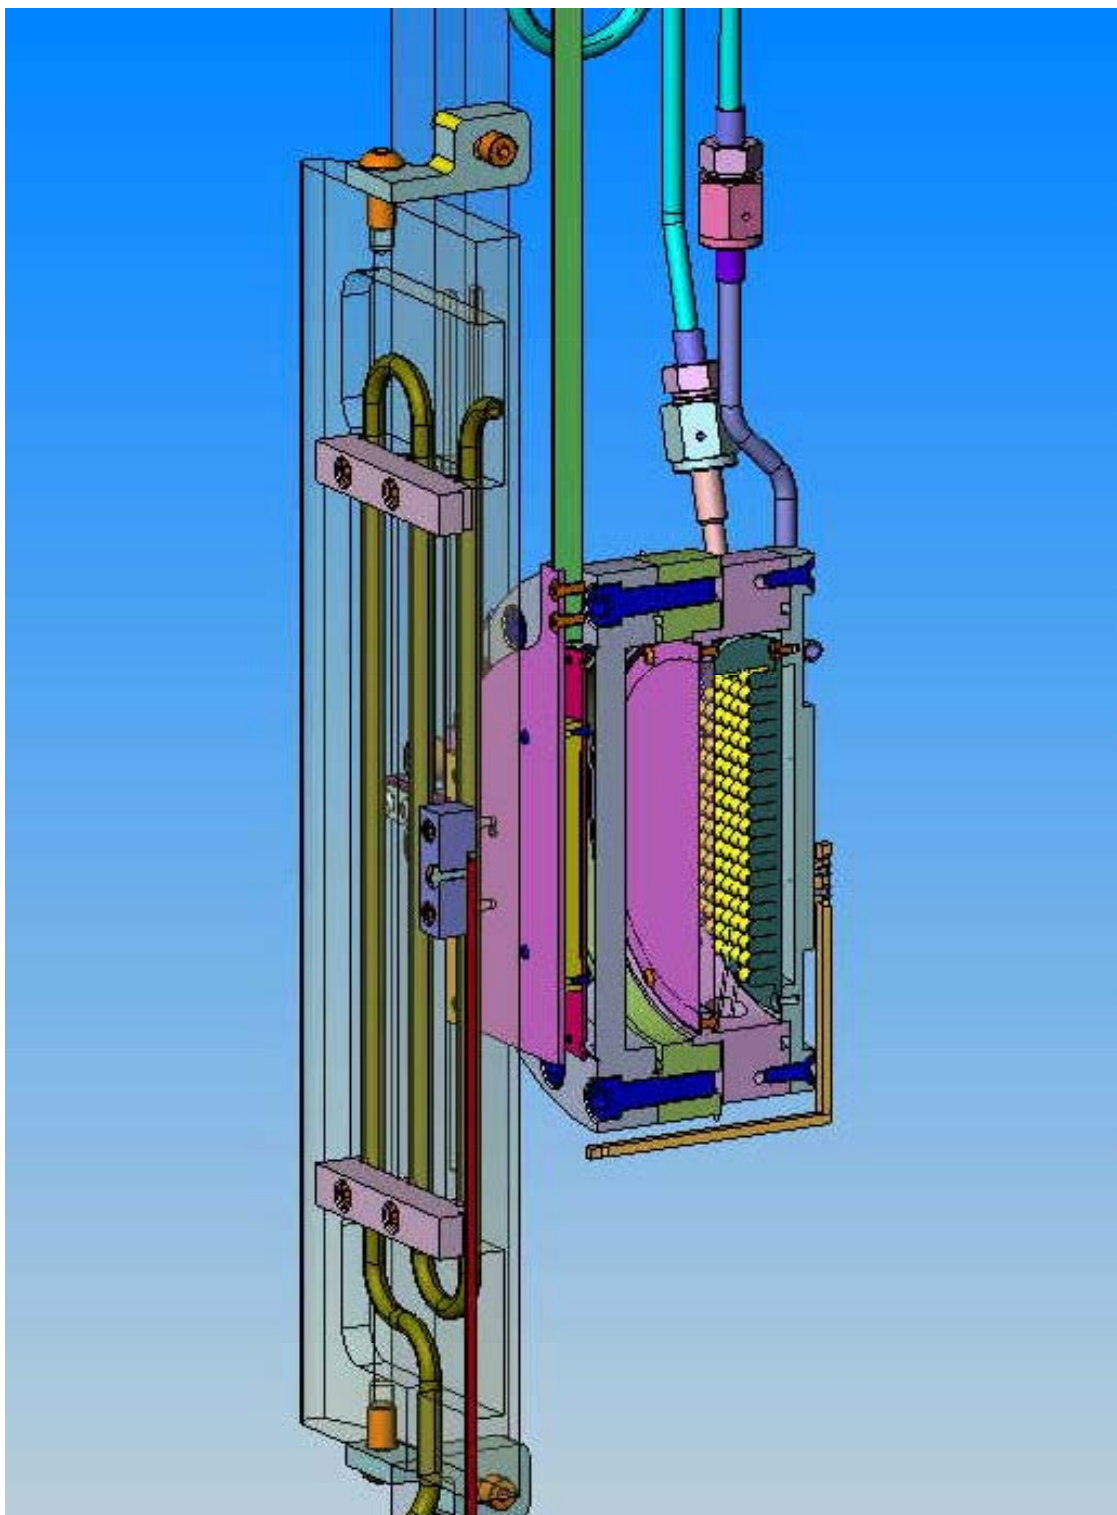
Component Cell PVCD assembly showing the sensor head, and web temperature and position stabilizing “pusher plate”.
